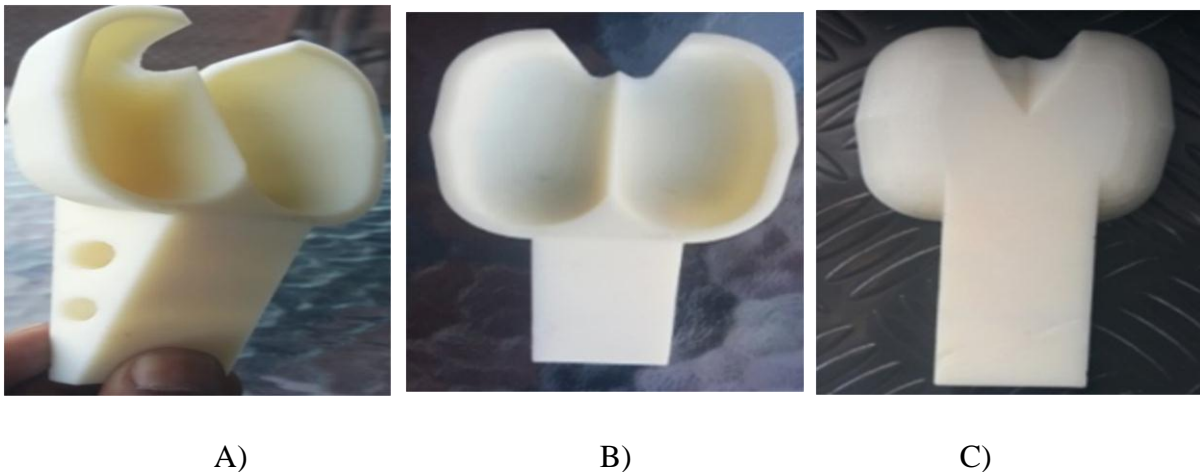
Photography of 3D printed optimized Pelton bucket A) Isometric View B) Front View C) Back View
